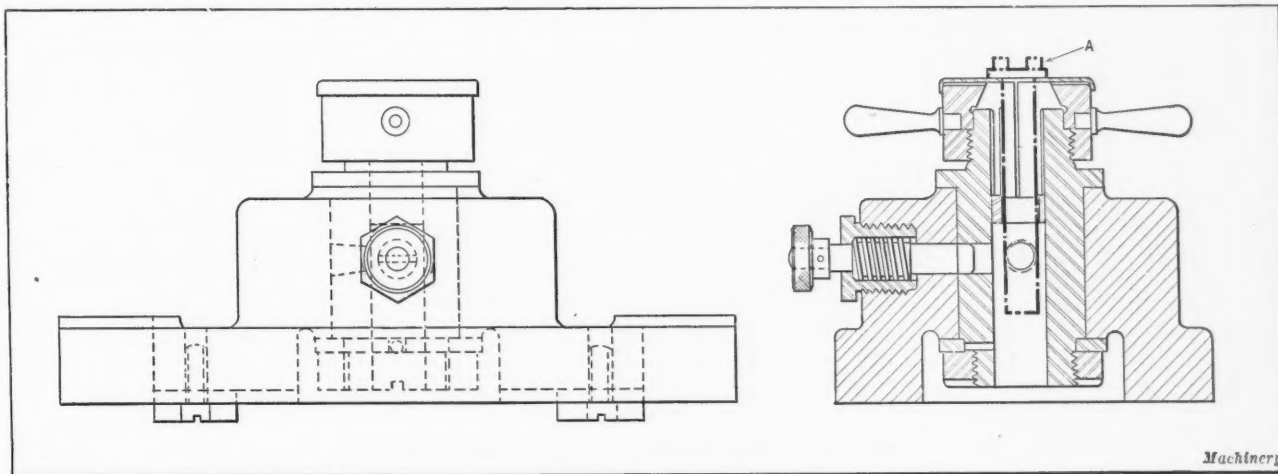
Fixture used in milling Cross-slots in Bolt Head
